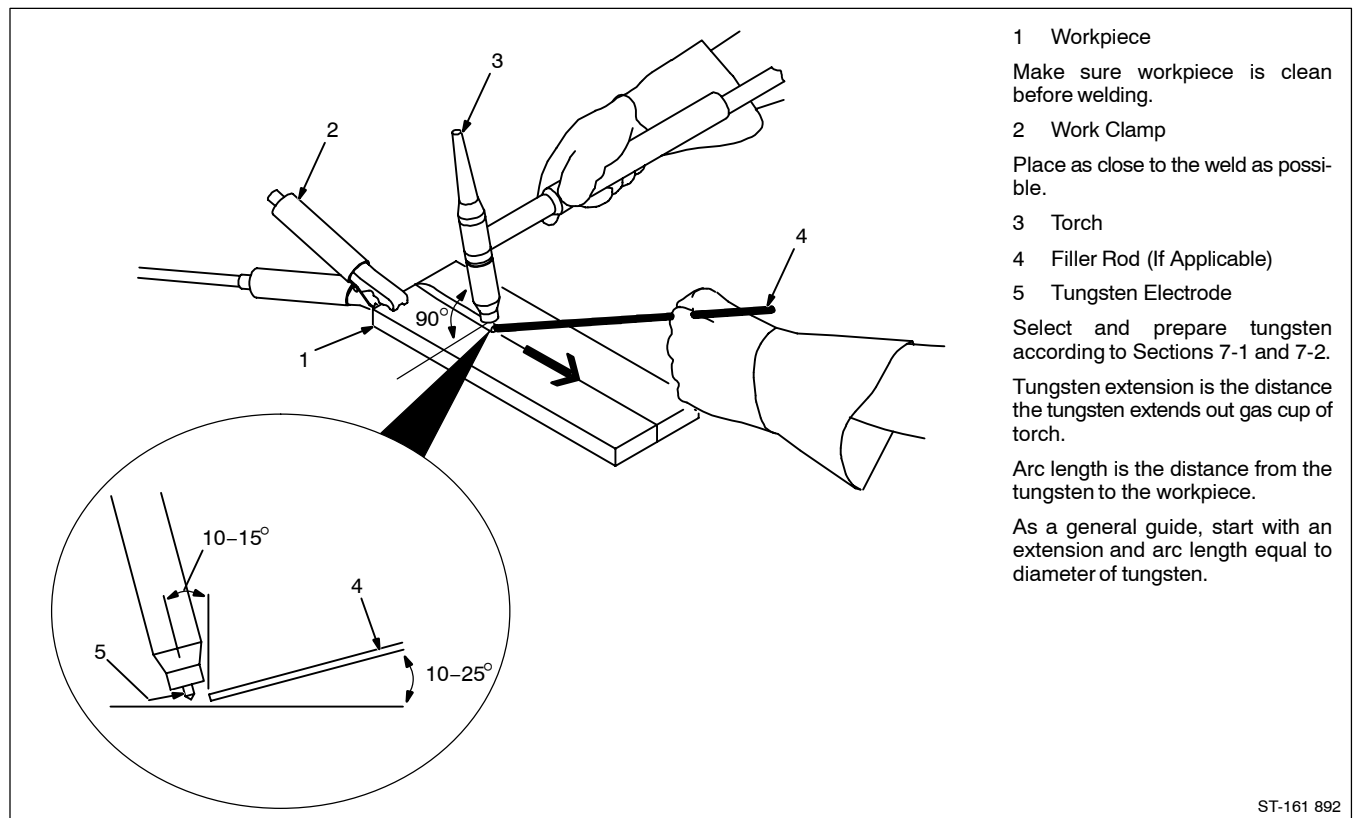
Gas Tungsten Arc Welding (GTAW) Positions
